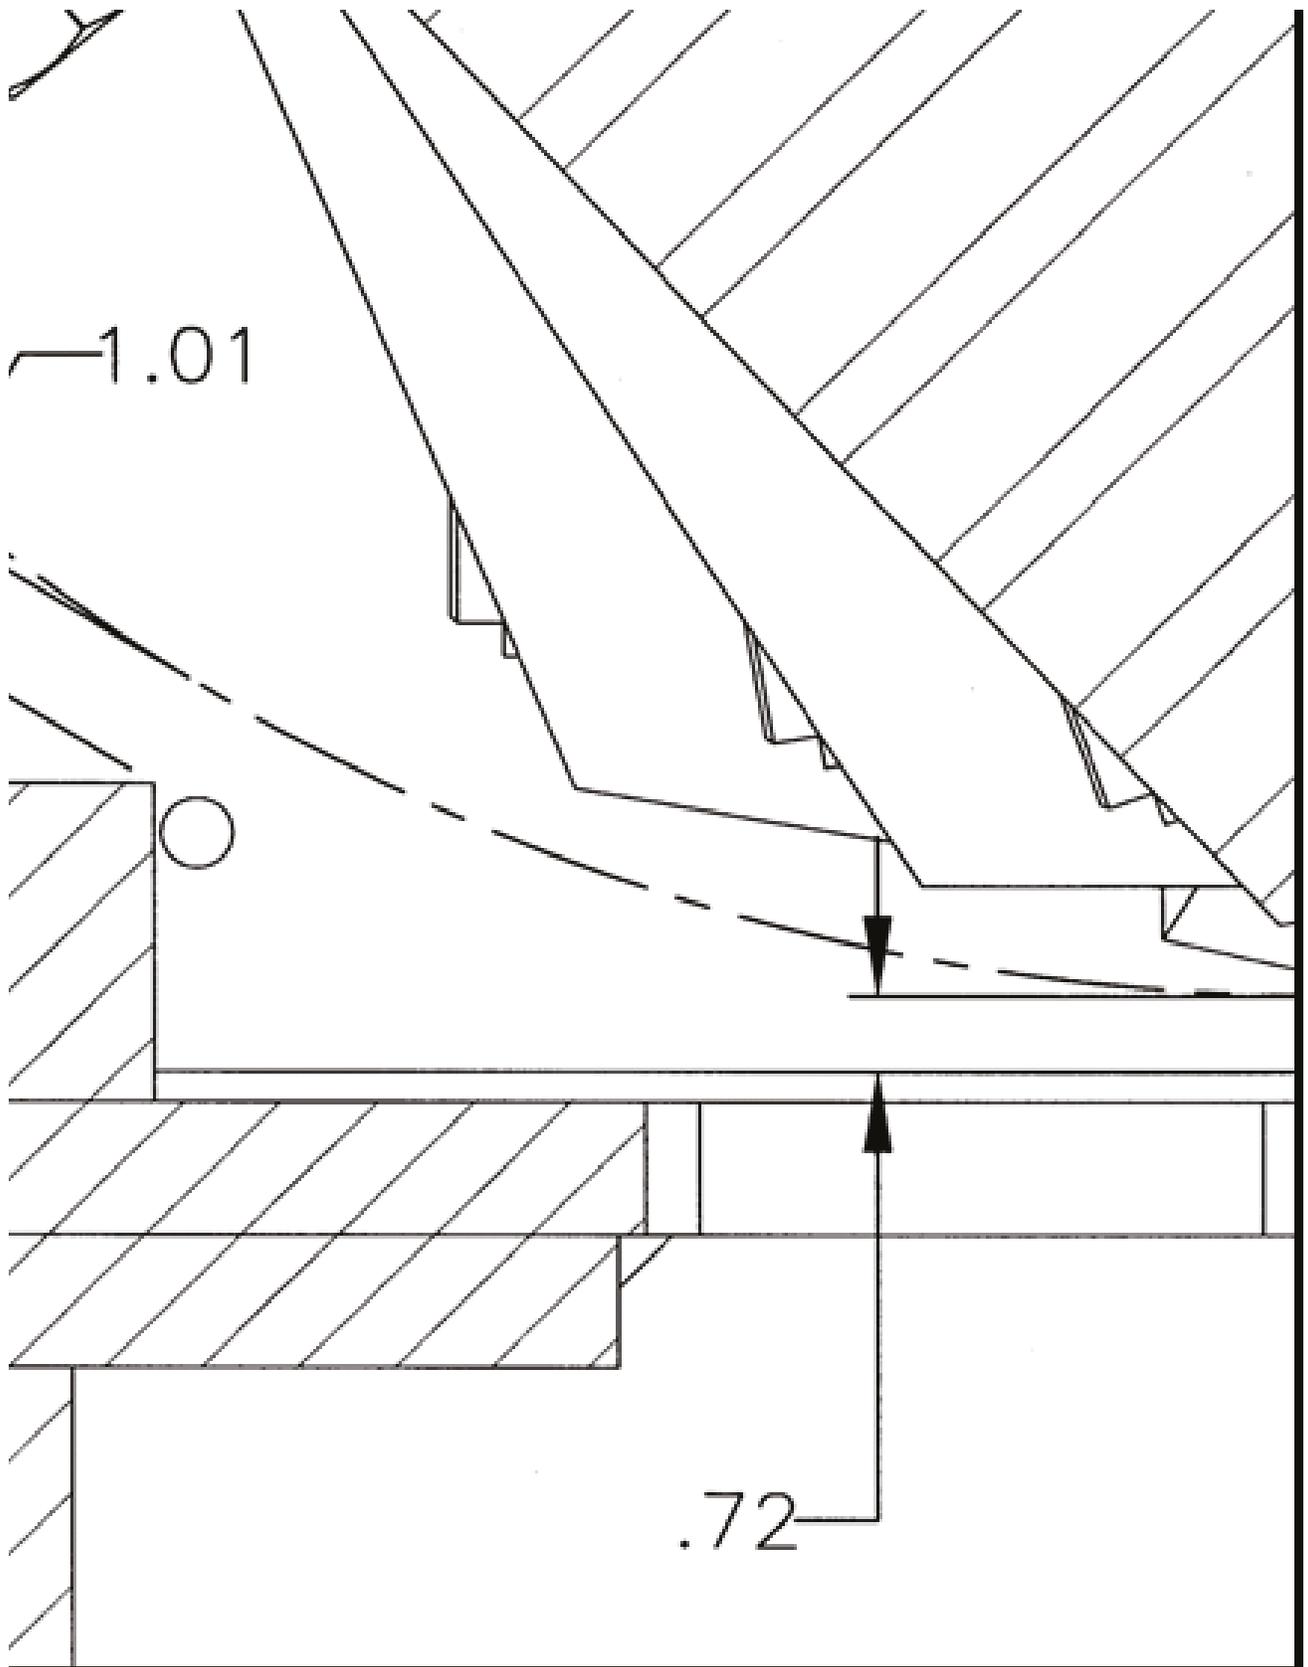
Clearance for Segmented Rotor, Short Strikers and Grate Liner
